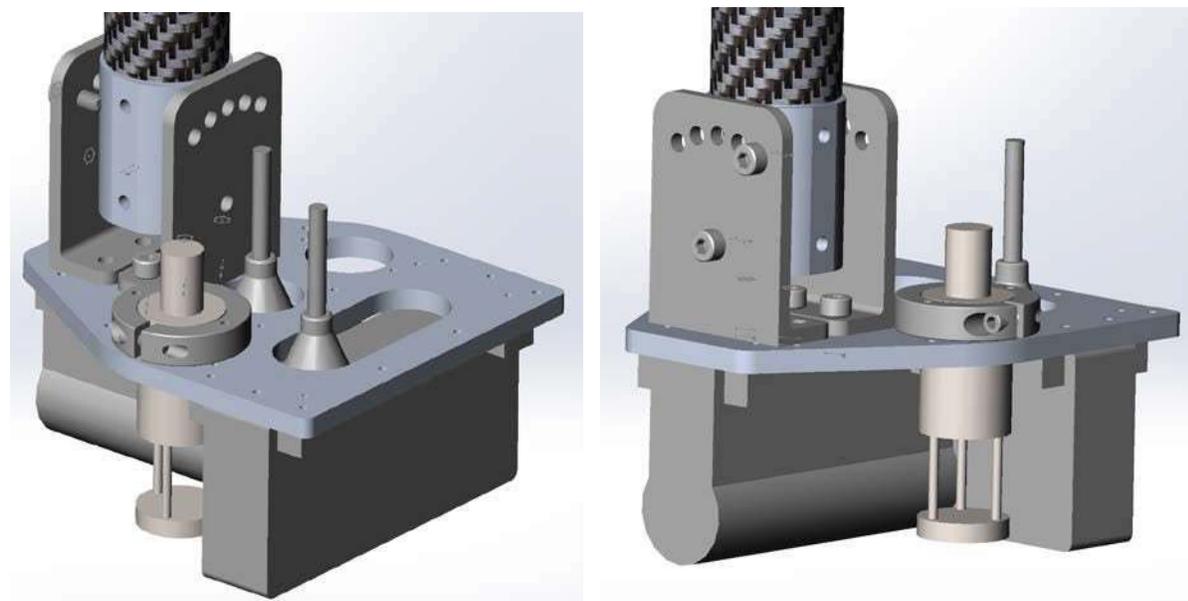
PicoMBES 120 sensor assembly CAD model
